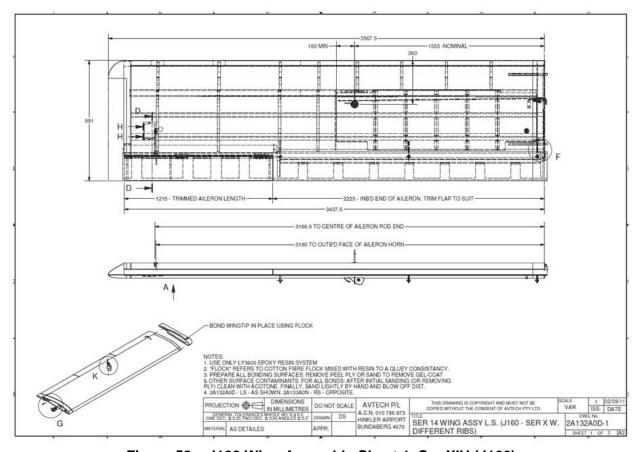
J160 Wing Assembly Sheet 1, Ser XIV (J160)
